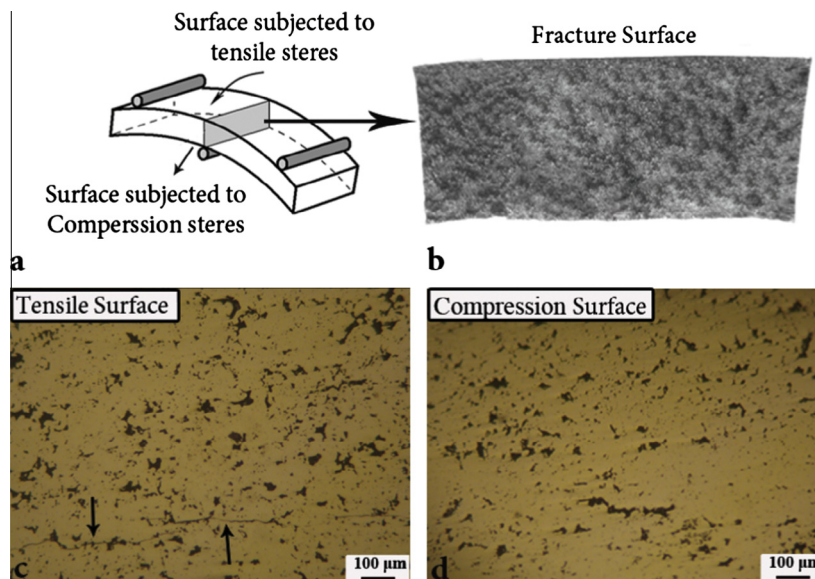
(a) Schematic of tensile and compression stresses that applied on sample surfaces, (b) macro image of fracture surface, (c) tensile surface with indication of cracks (arrows) and (d) compression surface which do not have any cracks as expect.
